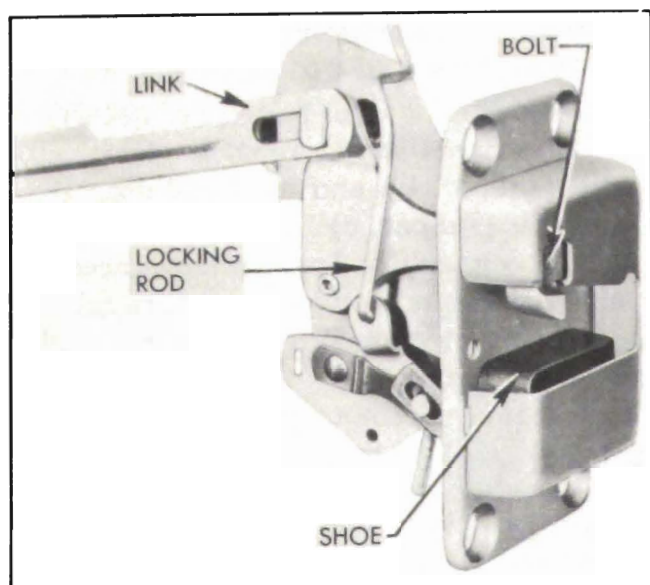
Door Lock, Inner Side—1949 Series 50-70
